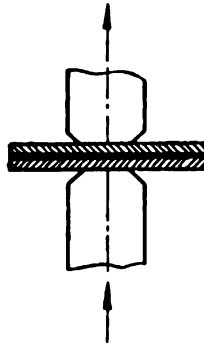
Position of solder and soldered parts between the electrodes of a spot-welding unit used in resistance soldering
